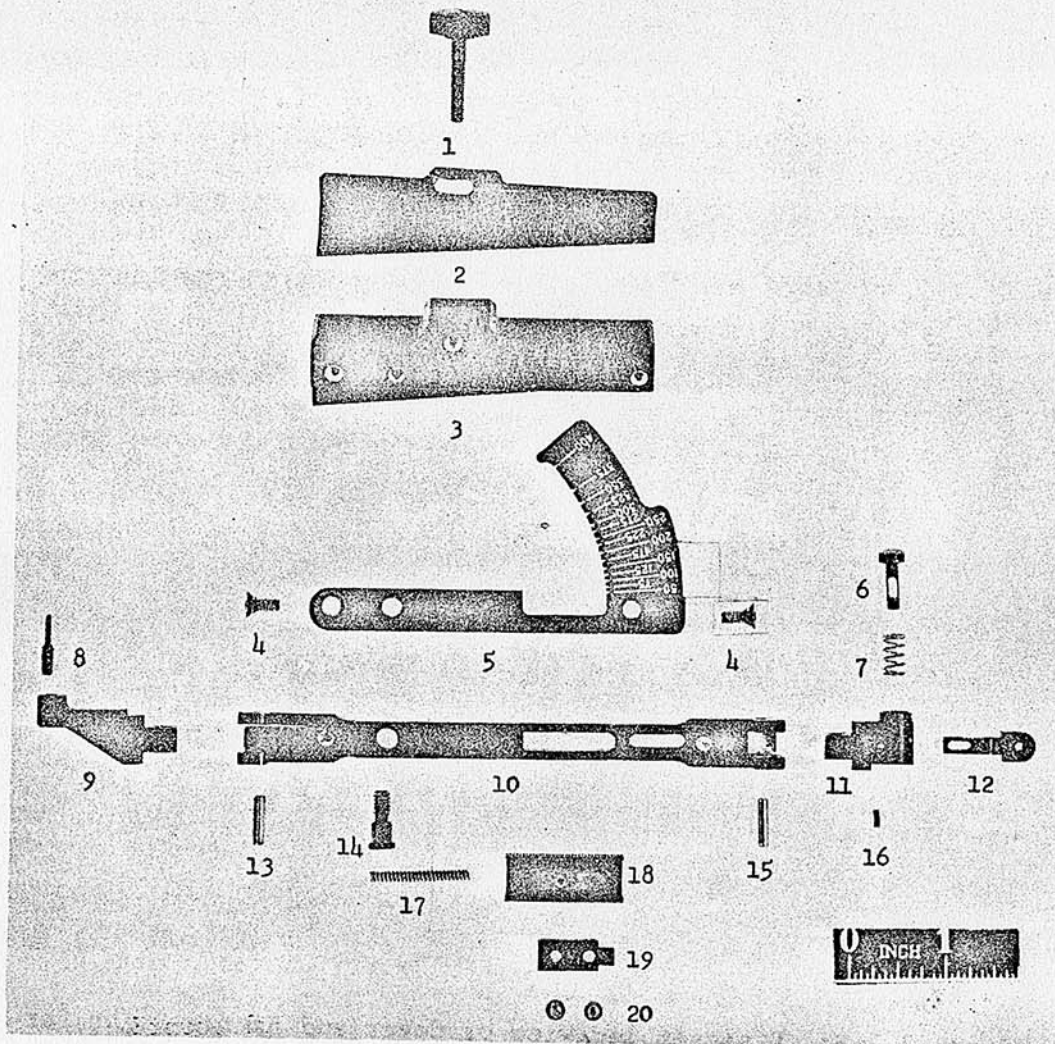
Disassembled View of Primary Sight for XM203 Grenade Launcher.
